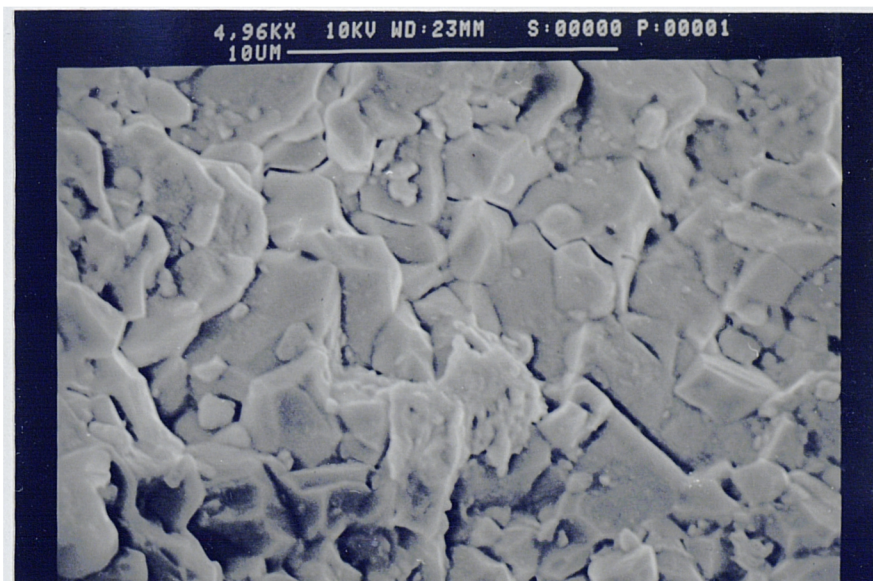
Formation of microcracks on the flank face of CC620 tool when used in dry machining of Waspaloy (V=90m/min, F=0.18mm/rev, DOC=2.5mm)
